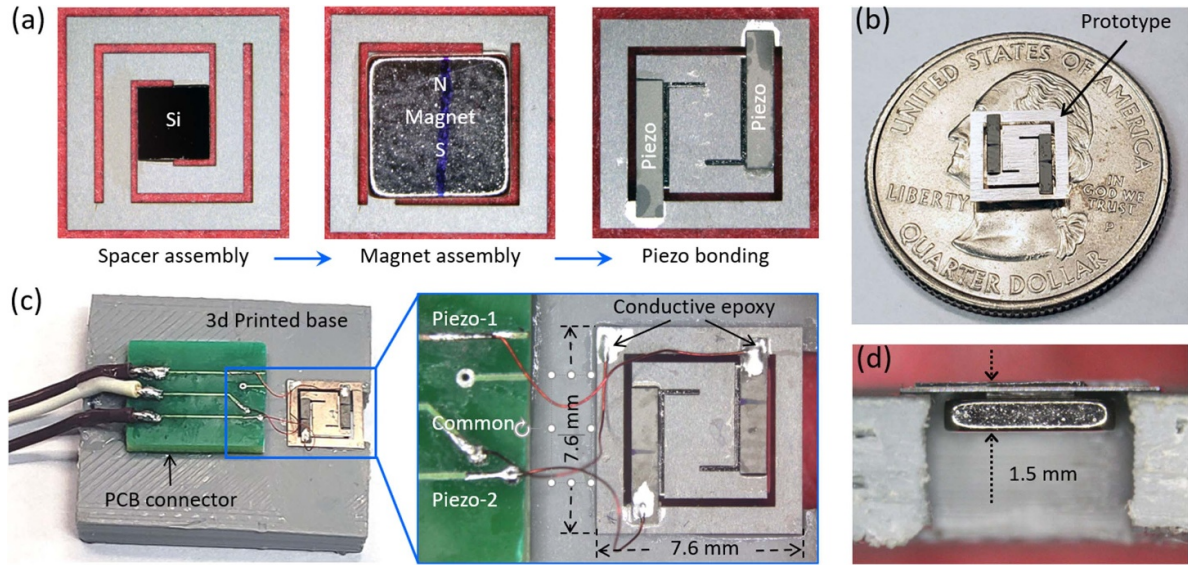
Photographs of (a) the receiver assembly process steps, (b) a fully assembled prototype with size compared to a US quarter dollar, (c) the prototype mounted to a 3D-printed plastic base and (d) the corresponding cross-section view showing the 1.5 mm device thickness.
